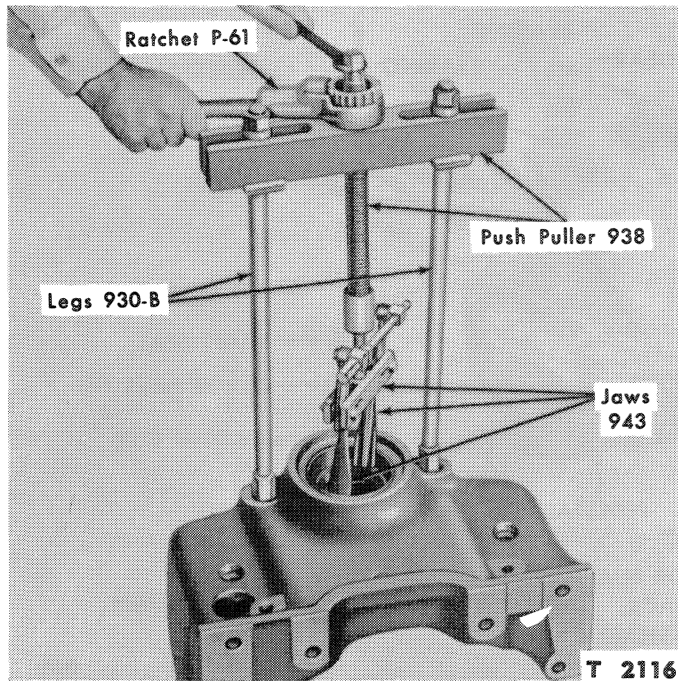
Pulling Pinion Shaft Lower Bearing Cup
